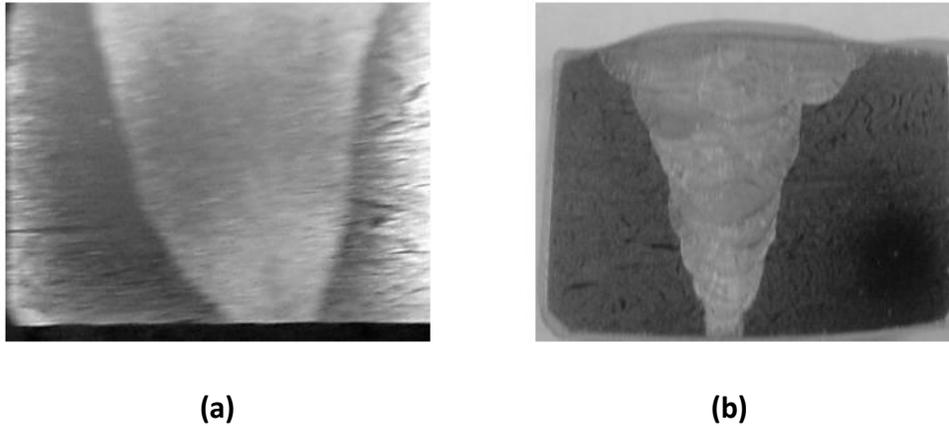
Cross-sections of the type 304LN stainless steel weld (10 mm thick) produced by (a) A-TIG welding (b) Multi-pass TIG welding
